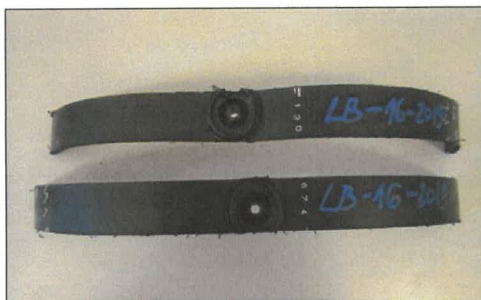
, 56 Samples LB/60/2018 before bending test on welded plugs
